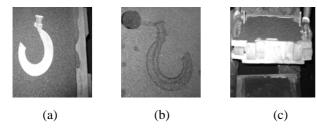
Experimental hook manufacturing system with traditional casting, using the RP pattern. (a) Half slice of RP hook placed in cope, (b) cope mold, (c) cope is being placed over drag.(same process has been used for making HTW inside valve)
